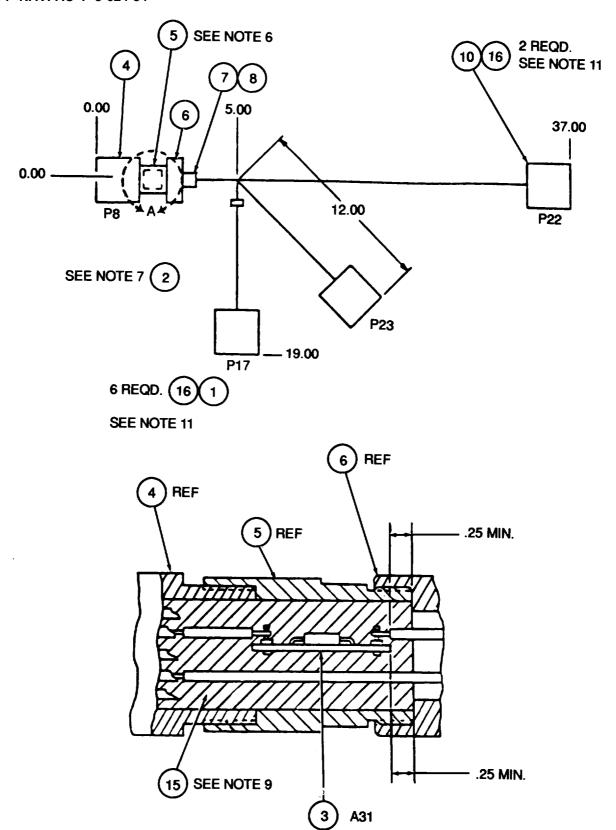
400 Hz Electric Governor System Wiring Harness Assembly Drawing No. 84-704 (Sheet) 1 of 2)
